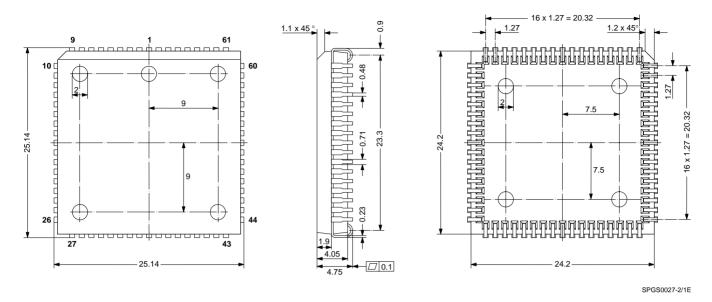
68-Pin Plastic Leaded Chip Carrier Package (PLCC68) Weight approximately 4.8 g Dimensions in mm
